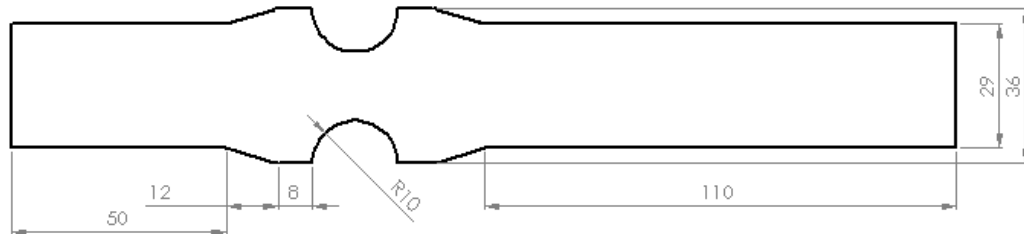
Technical drawing of a plane strain fracture specimen for high strain rate loading
